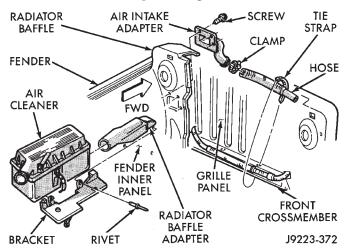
Air Cleaner Housing and Radiator Baffle Adapter Fender
